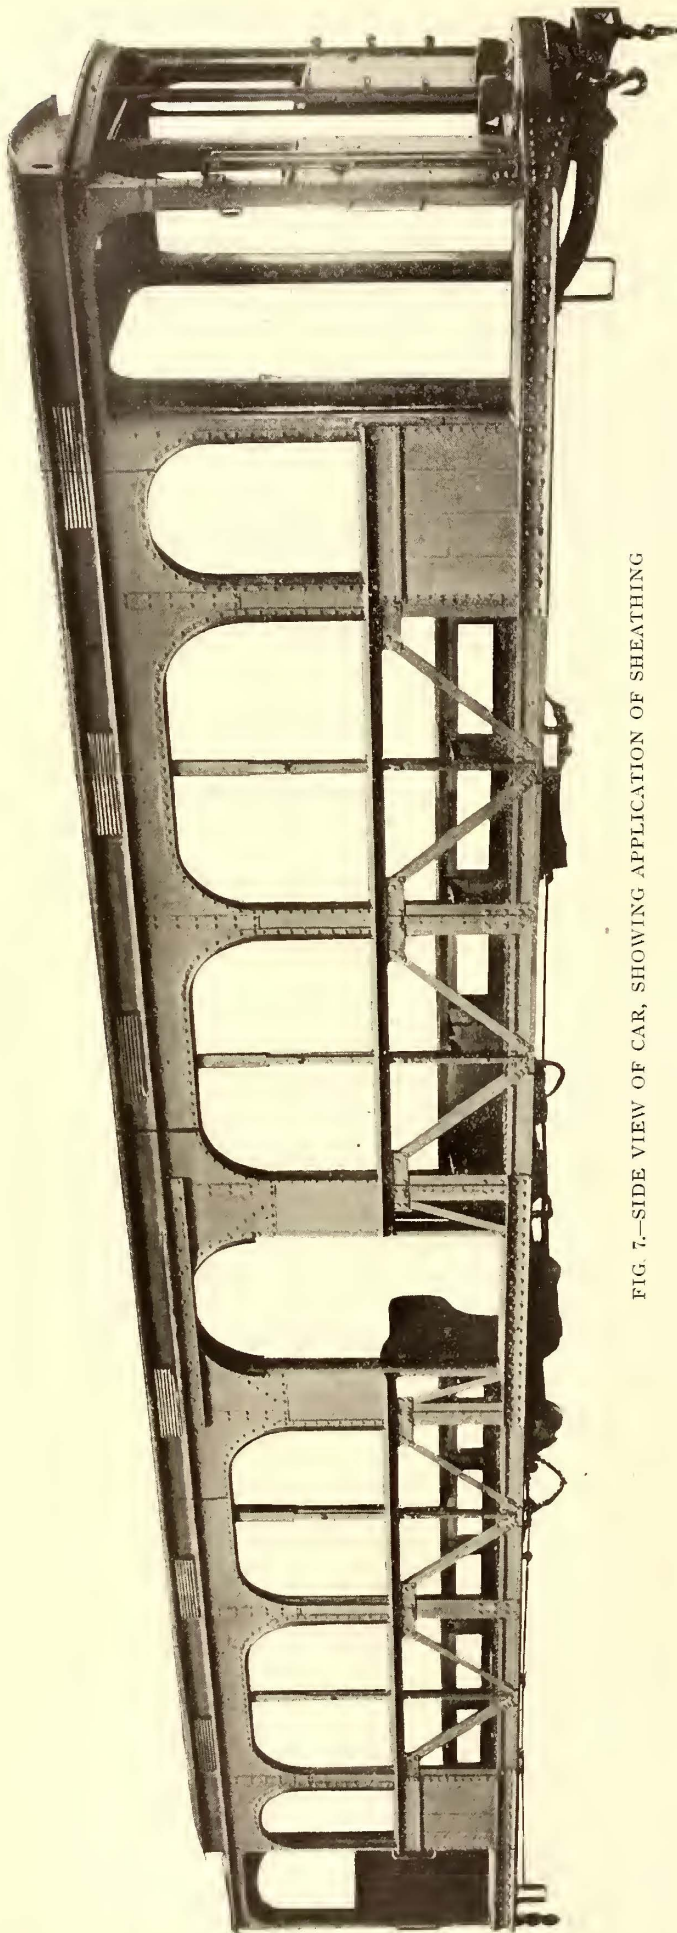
SIDE VIEW OF CAR, SHOWING APPLICATION OF SHEATHING
